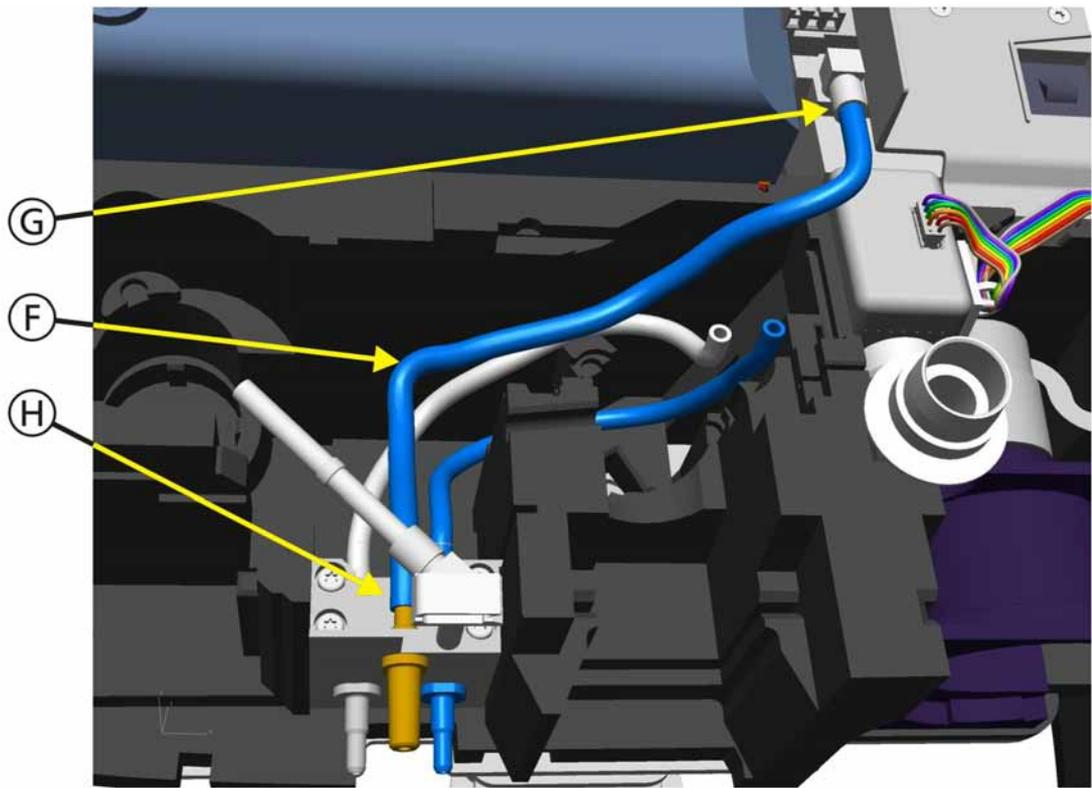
Front Panel Connector Block and Tubing Assembly, Step 3
